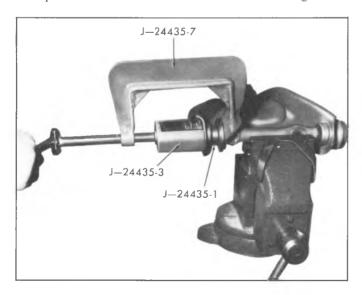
C-22--U.C.A. Rubber Bushing Removal
